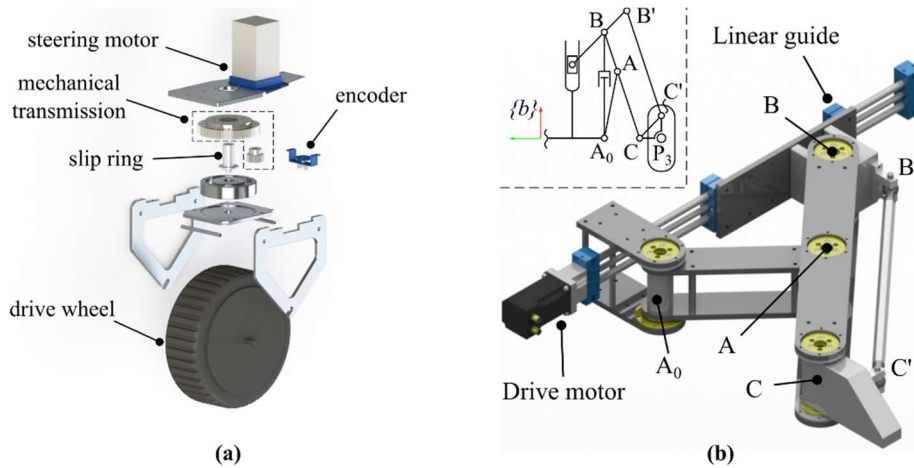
(a) SW unit exploded view. (b) Track adjustment mechanism final design.
